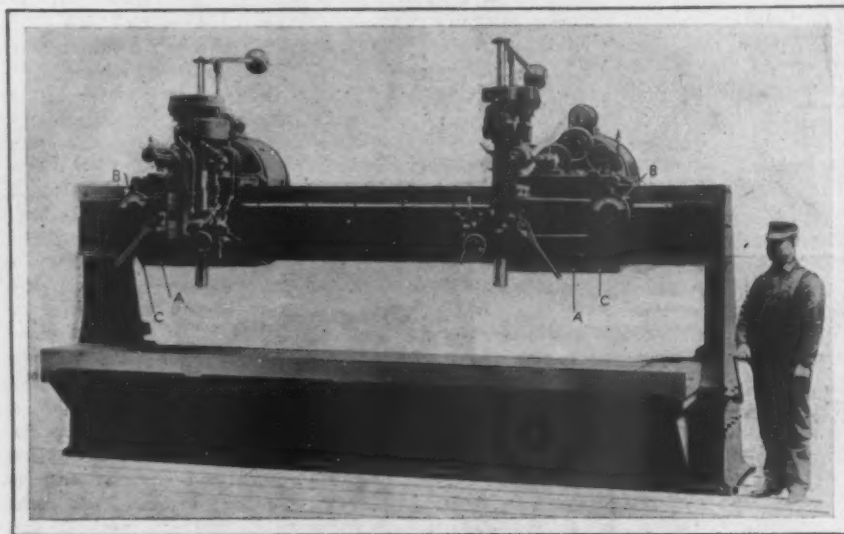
Front View of a New Heavy Mud Ring and Flue Sheet Drilling Machine Built by the Foote-Burt Company, Cleveland, Ohio
